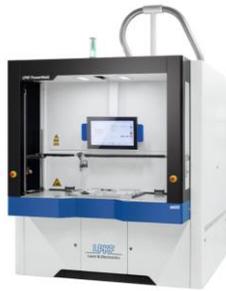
An LPKF laser machine, comparable to this LPKF PowerWeld 6600 model, welds the valve block components together.
